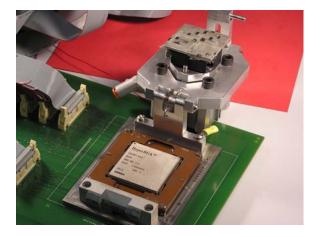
This is a picture of the 52.5 mm FCPBGA-HP module / interposer assembly test vehicle in the open clam shell socket test fixture.
